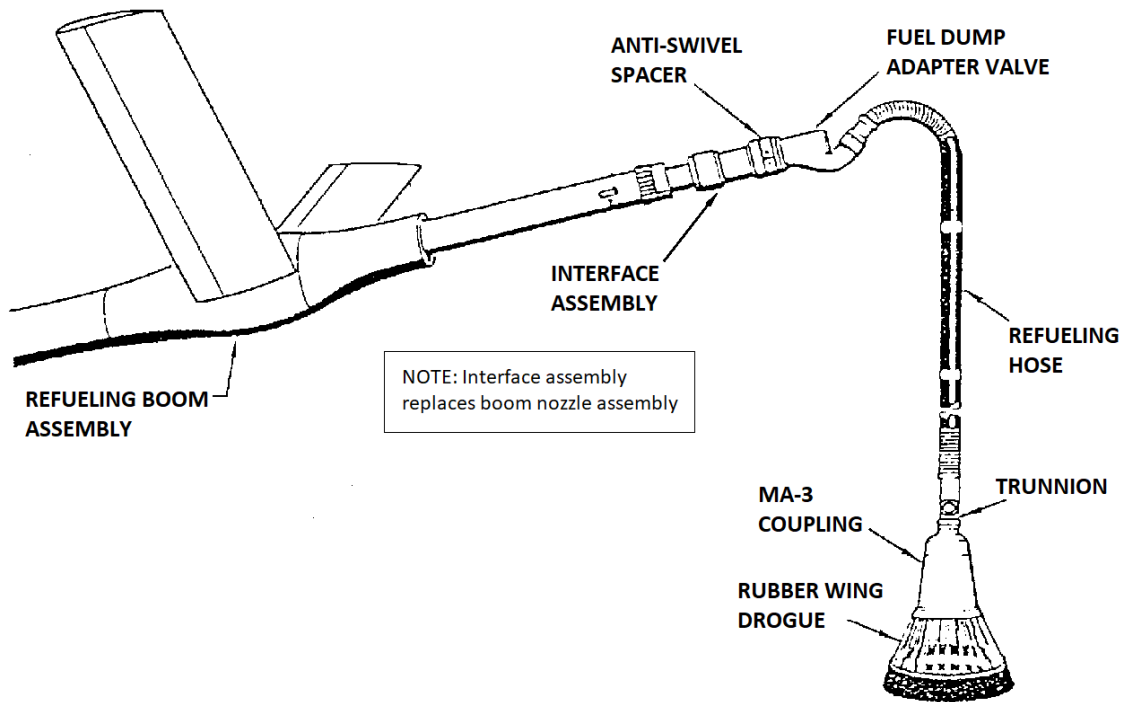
Boom-to-Drogue Adapter (BDA) Conversion Kit
